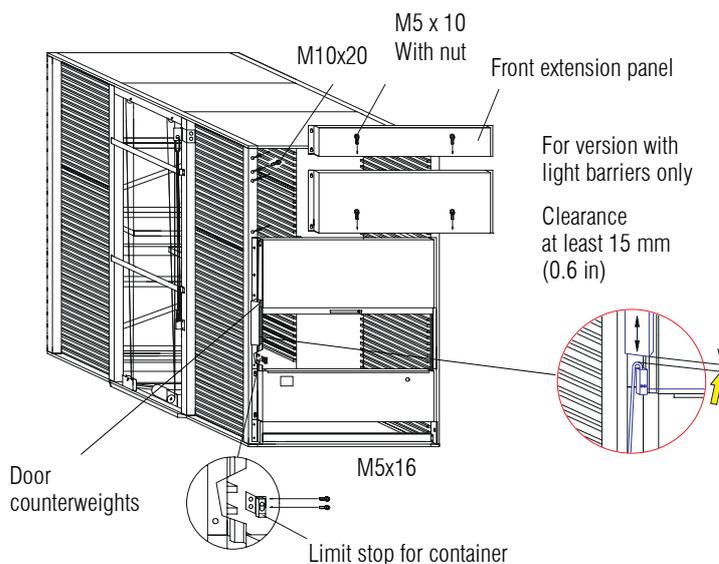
Installing the sliding door cable, top front panels and container limit stop
